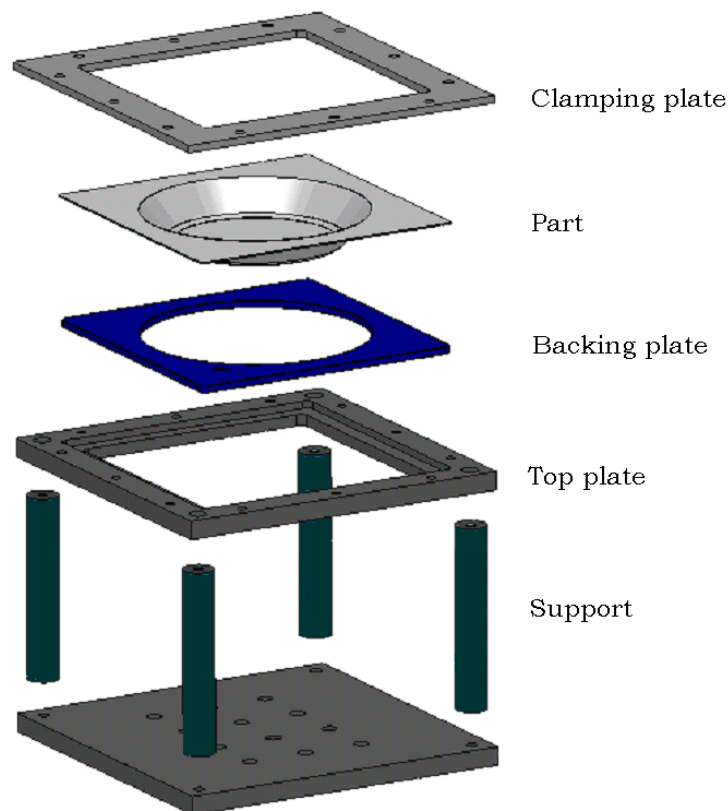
Exploded assembly view of the clamping device; picture courtesy of Johan VERBERT (KUL)
